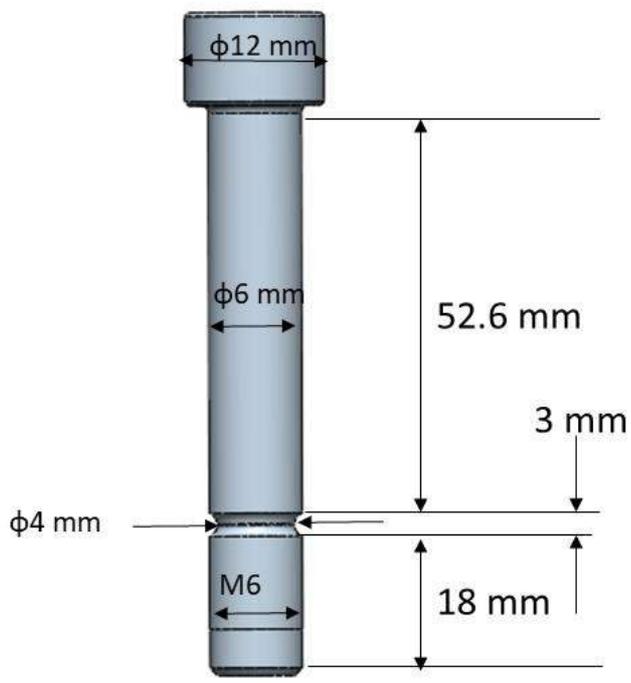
Shear Pin Assembly (Isometric Cut View)
